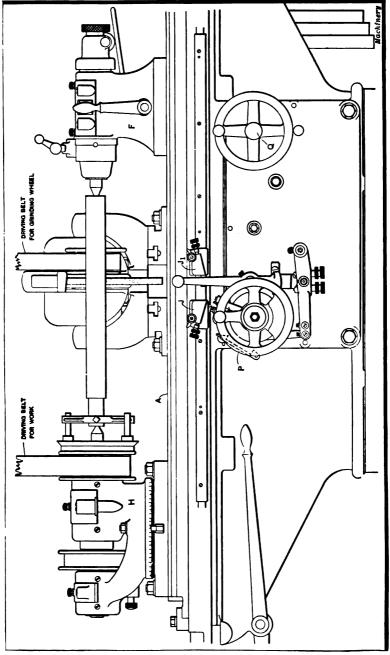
Type of Machine illustrated in Fig. 2, arranged for Grinding a Cylindrical Shaft
